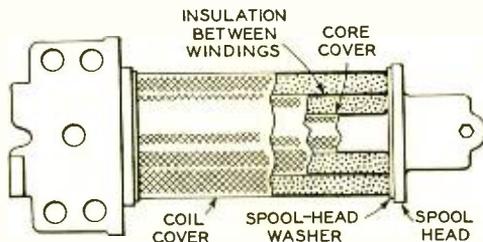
Schematic cross-section of a typical relay showing major insulating parts
